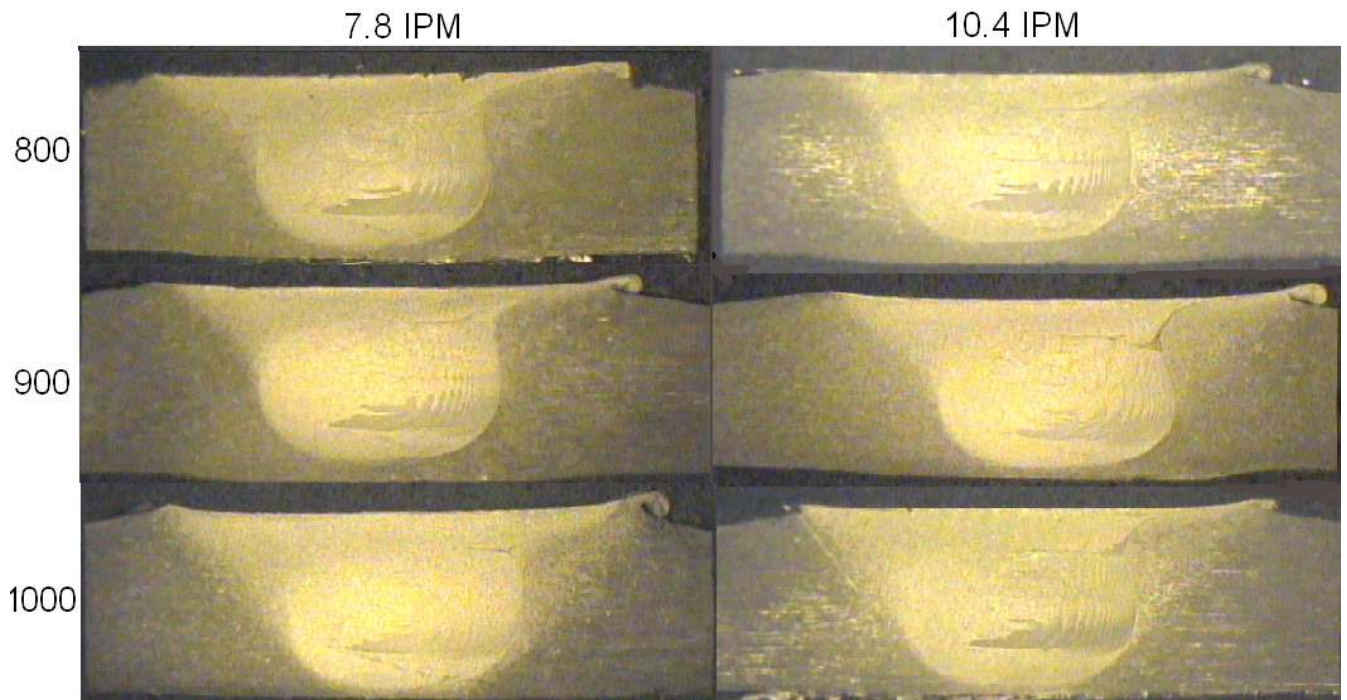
Lateral macrosections for full-penetration, supported welds made with the cupped shoulder, threaded probe tool. Samples are taken from the steady-state portion of each weld. Bose's reagent was used for etching.
